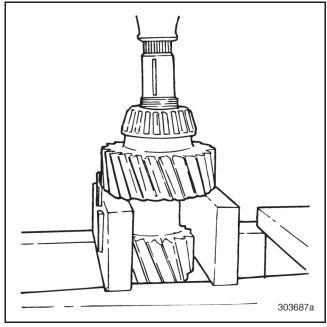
Pressing Off Hi-Range Gear and Rear Bearing Cone
